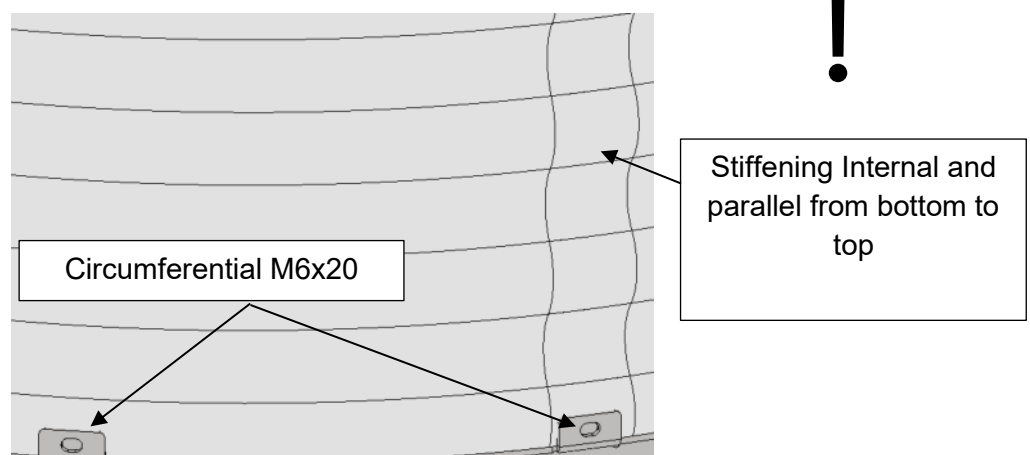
Detail of assembly step 5: Outer tube made of perforated sheet.
